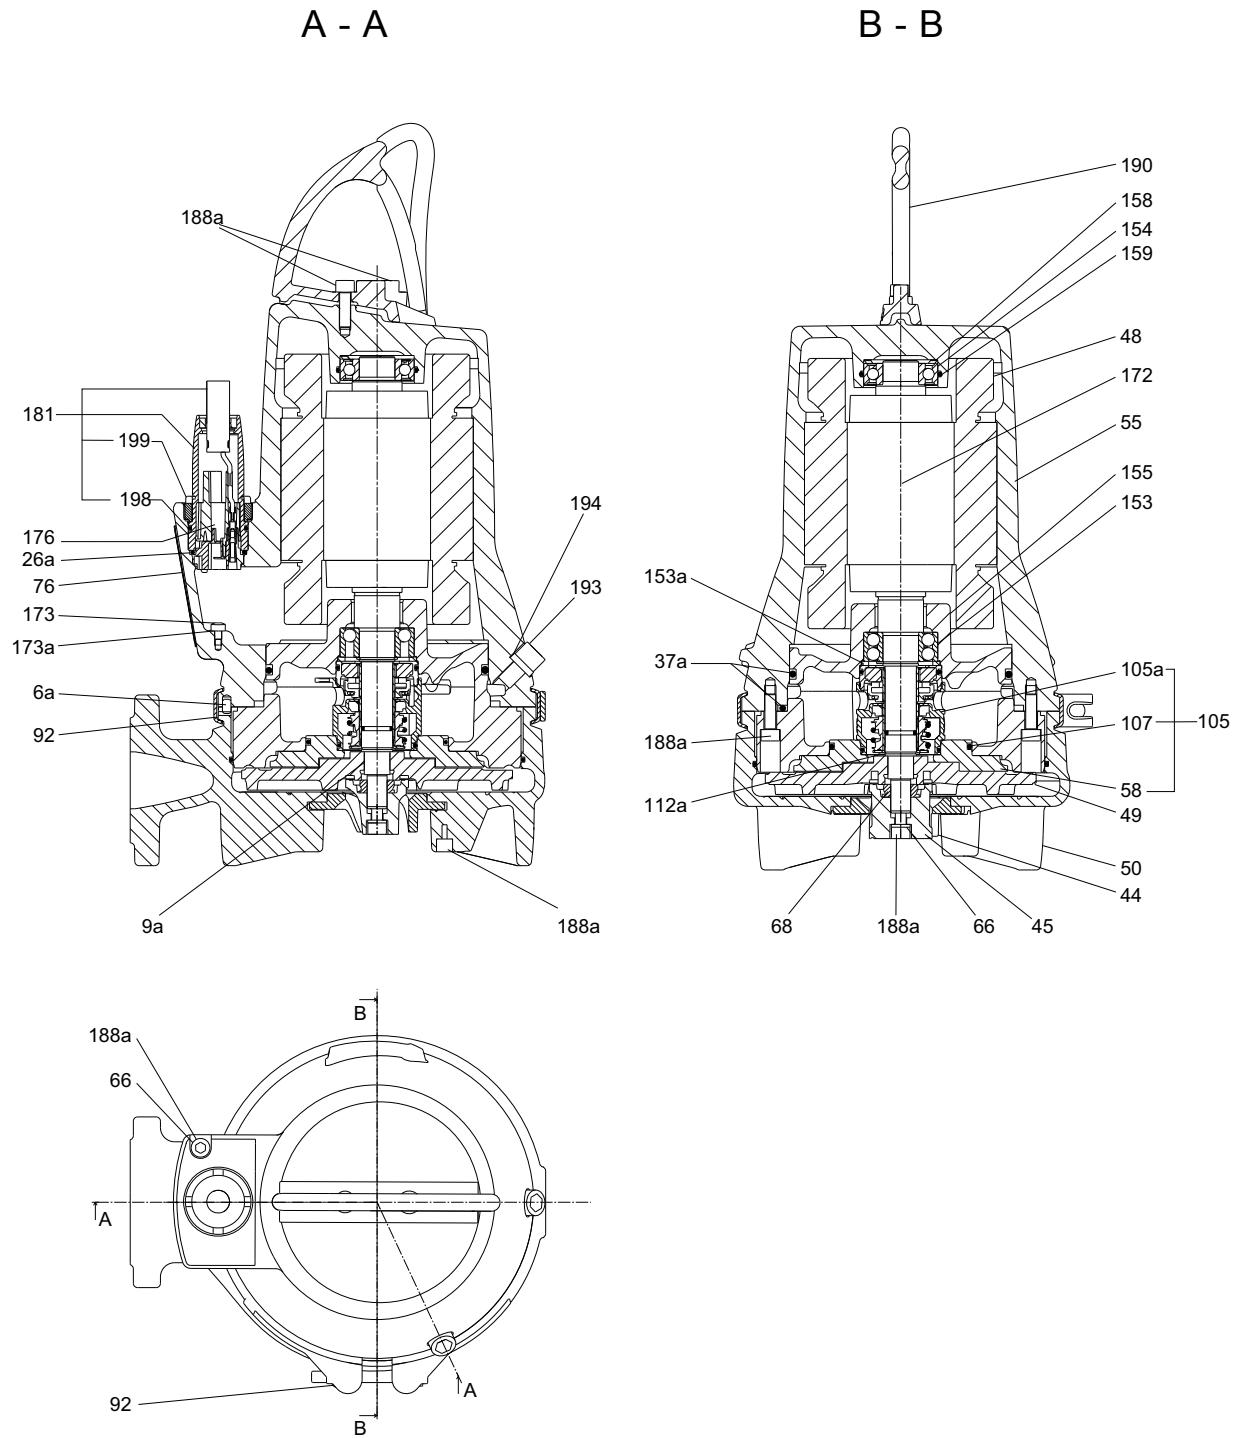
Exploded view of SEG pumps, 2.0 hp (1.5 kW)
